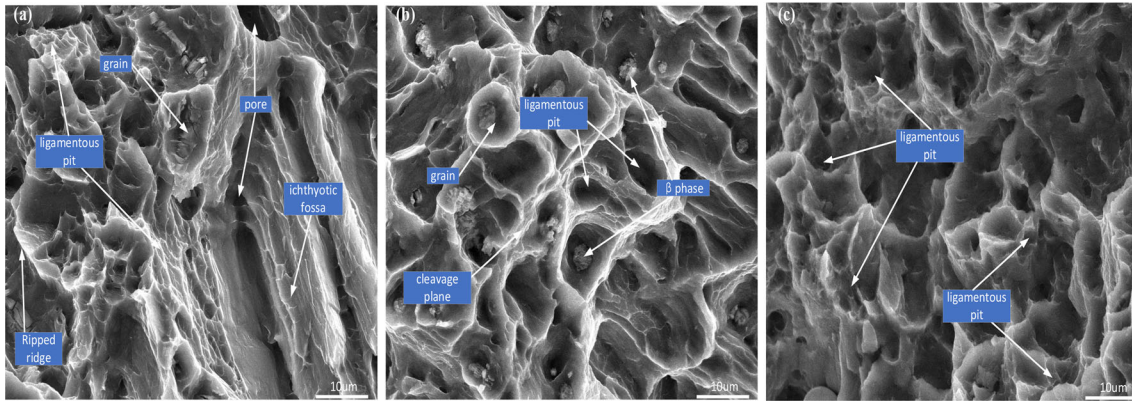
Bending fracture morphology analysis (a) casting (b) T6 treatment (c) extrusion
